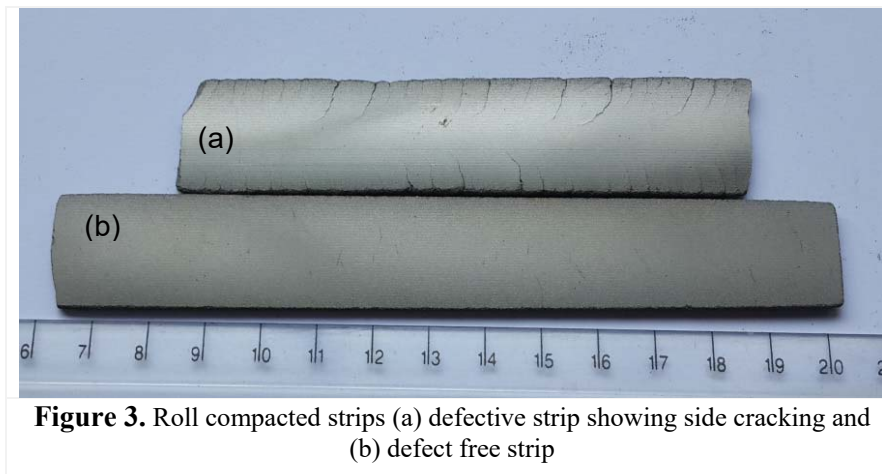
Roll compacted strips (a) defective strip showing side cracking and (b) defect free strip
